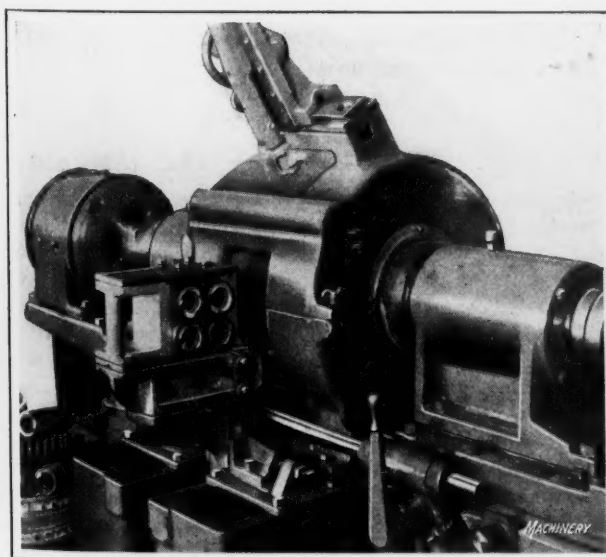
Fixture employed for grinding Ends of Heavy Coil Springs
